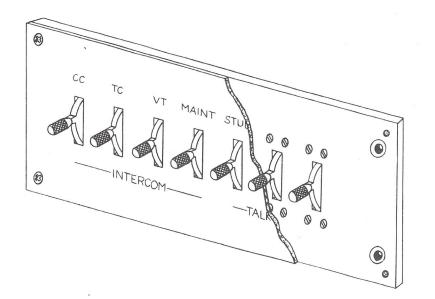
An escutcheon panel improves the appearance of a panel by covering the heads of equipment mounting screws.
